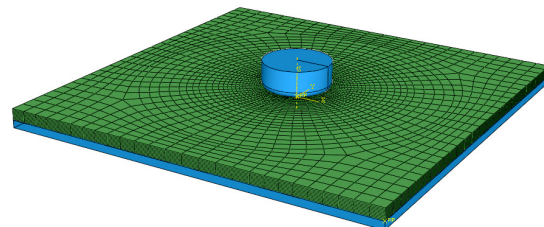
Finite element model (consisting of welding plate, tool and backing plate)
